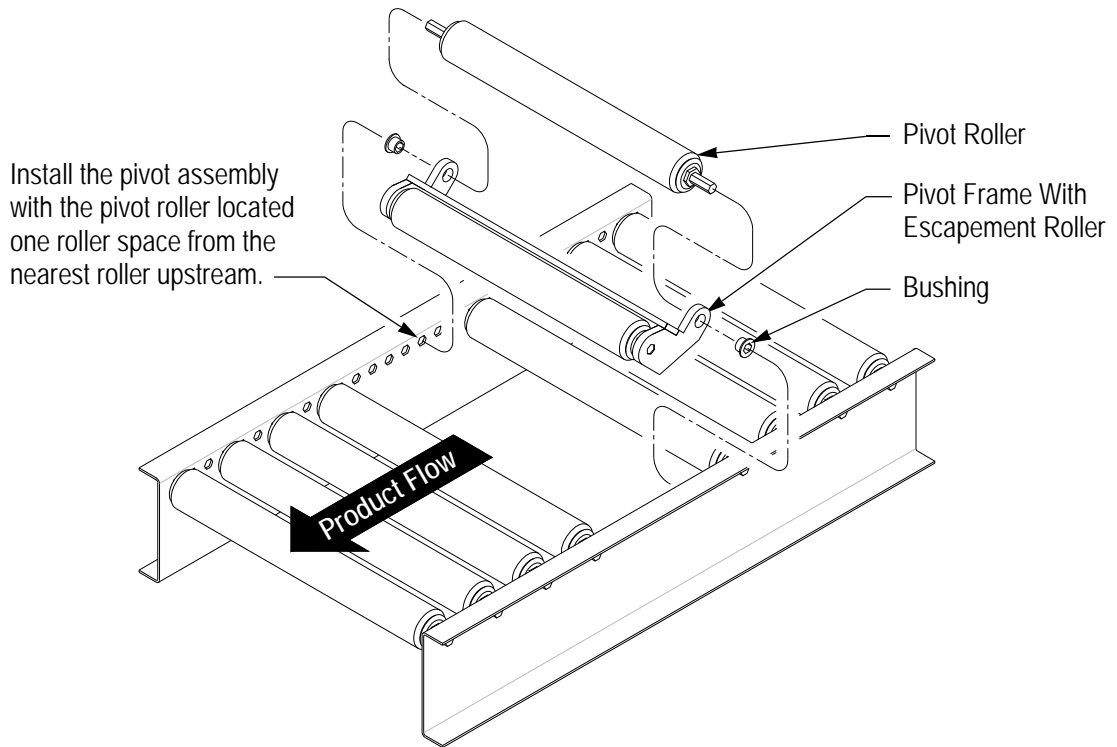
Install The Pivot Assembly – 3" & 6" Roller Centers
